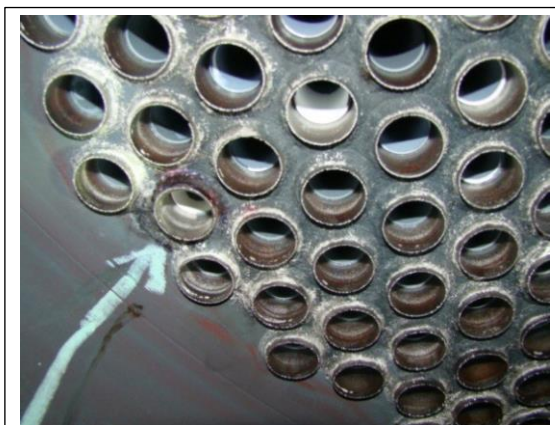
Condition of the bottom TTS welds in 2012
